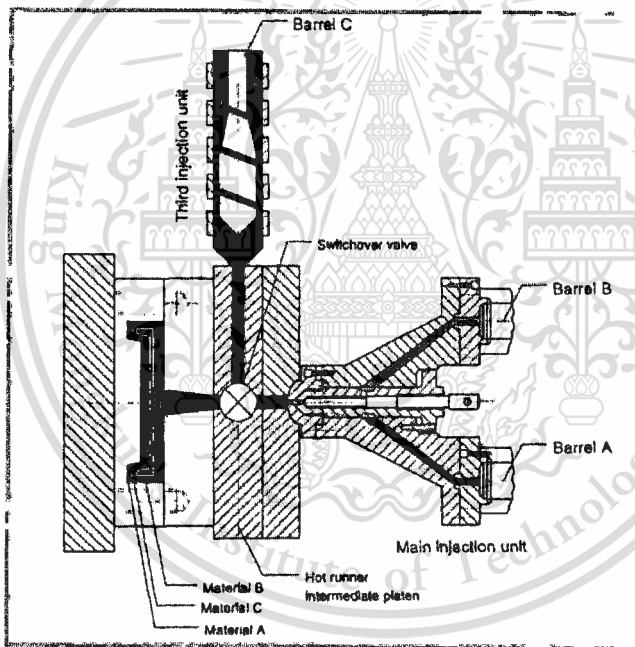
Three-channel nozzle technique (Battenfeld)[22]
